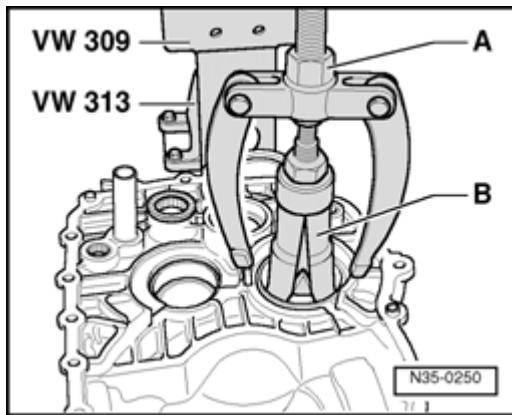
Pulling tapered roller bearing outer race out of transmission housing
